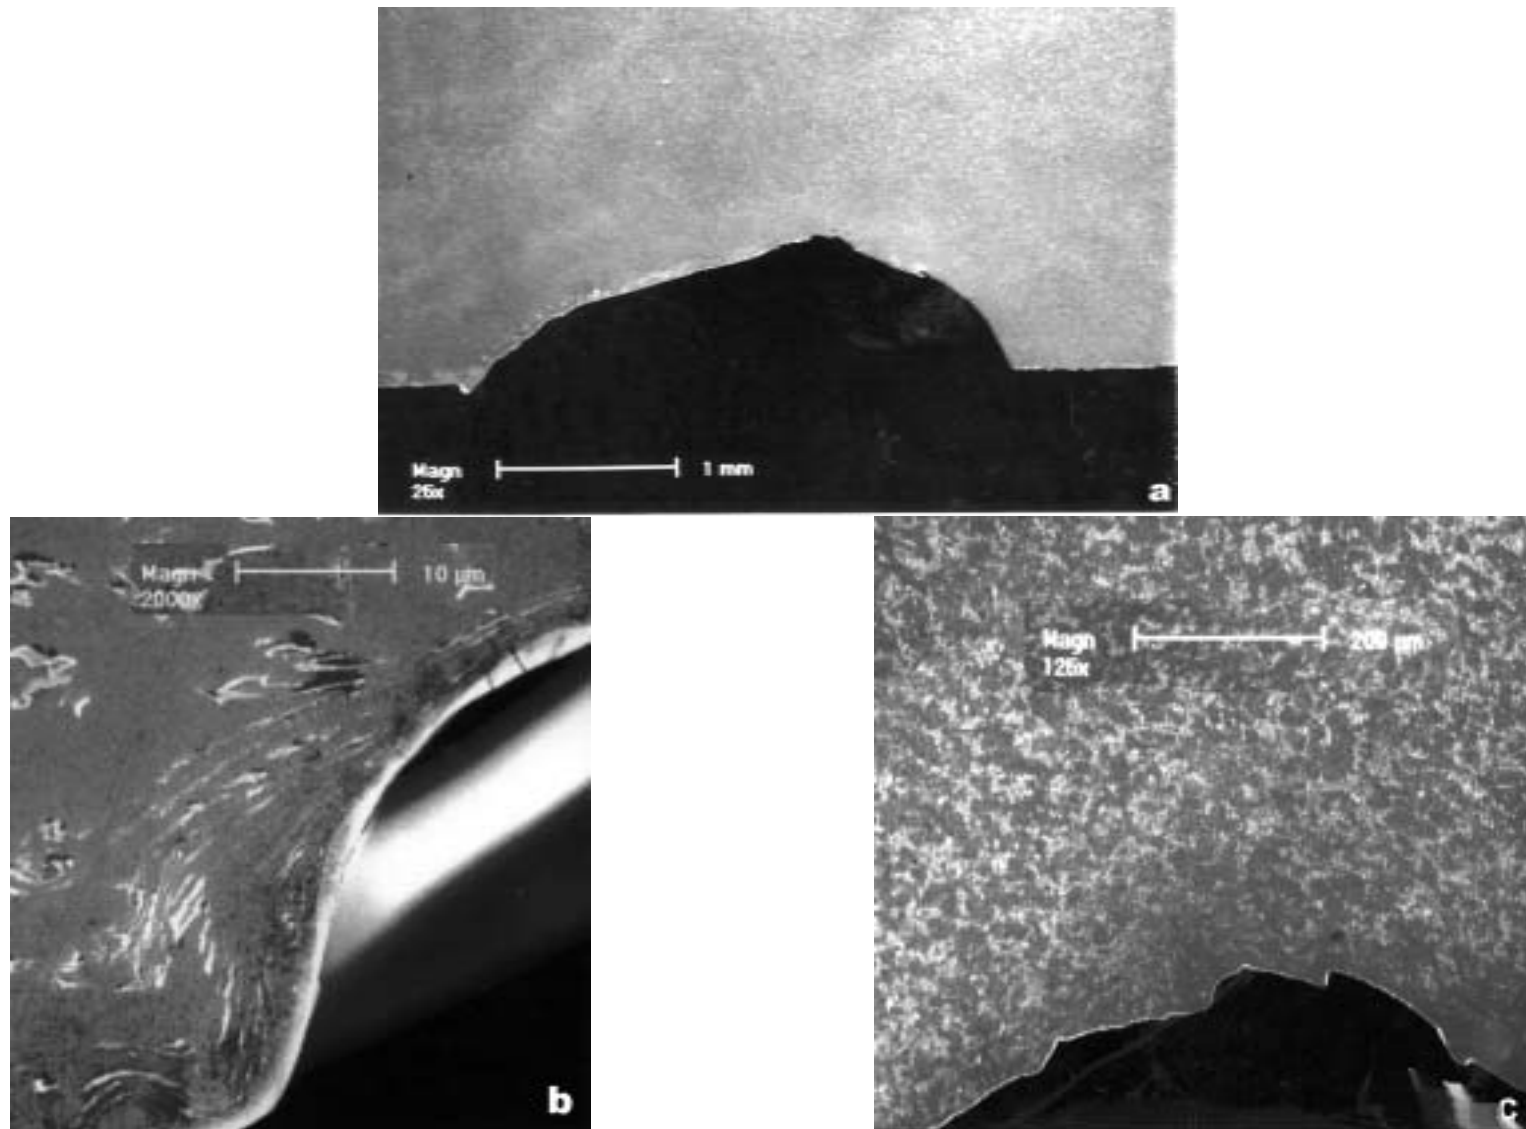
A.12. C-shaped FOD from F-100 3rd stage fan blade showing: (a) sectioned view of 0.027-in.-deep notch with 0.065E.in.-root radius, (b) deformed microstructure on notch flank, and (c) magnified view of FOD showing irregular surface.
